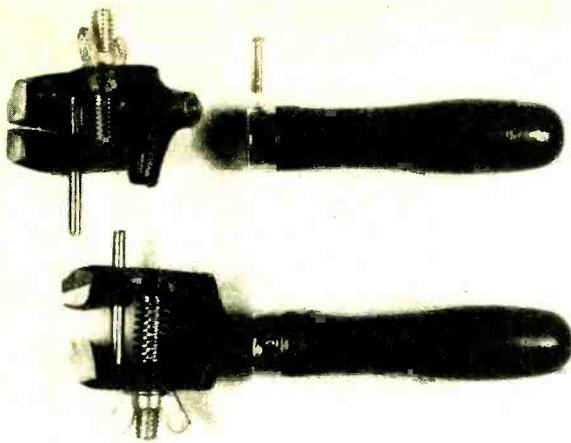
PIN VISE is converted into PC board holder by drilling and tapping.
